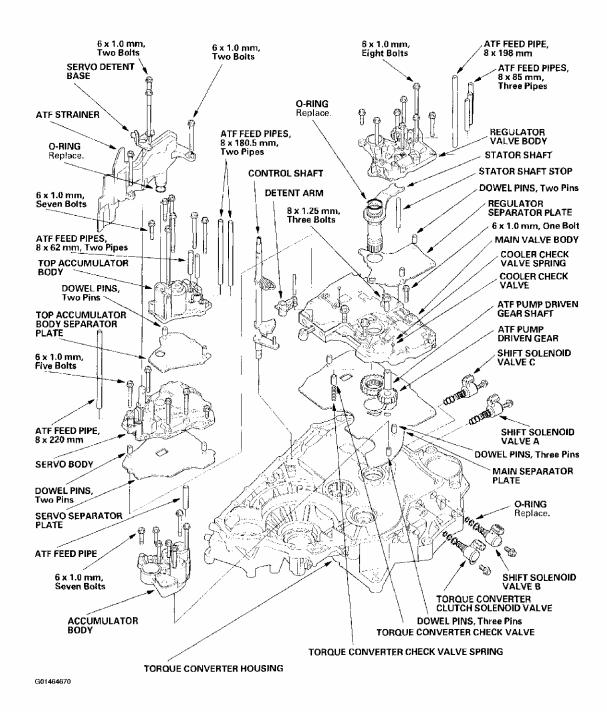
Exploded View Of Valve Body Courtesy of AMERICAN HONDA MOTOR CO., INC.
